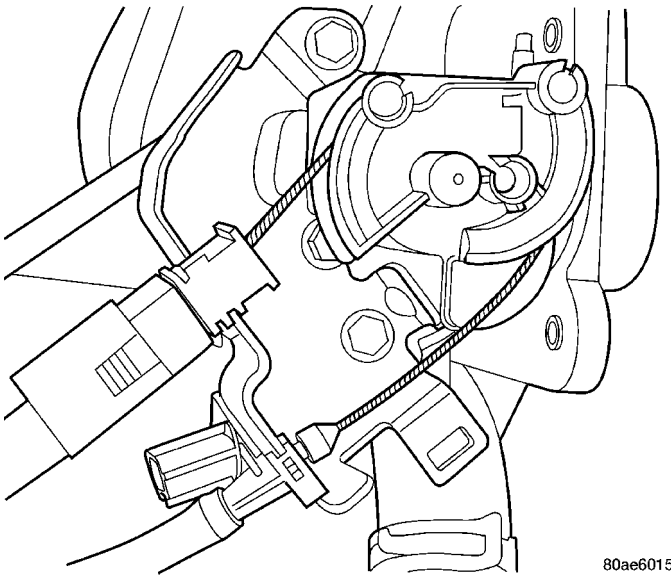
Throttle Body Cables Attachment to Throttle Body
